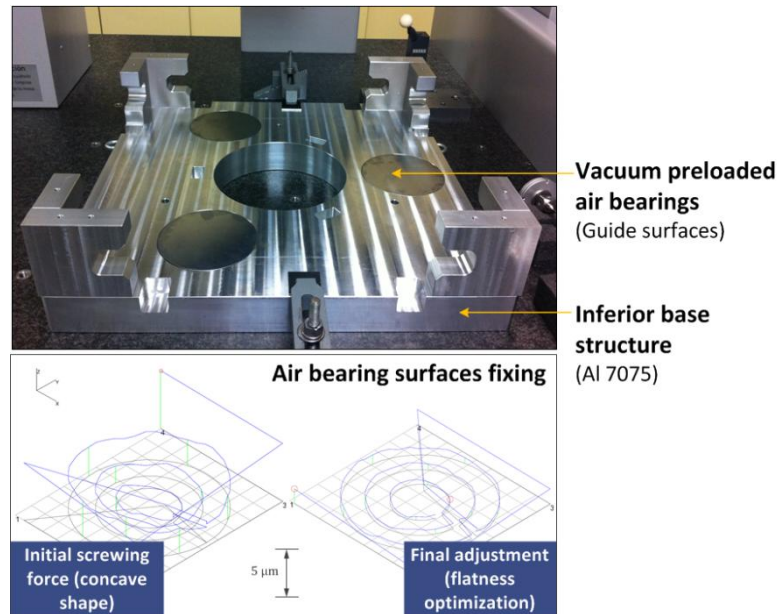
Inferior base assembly and air bearings surfaces adjustment
